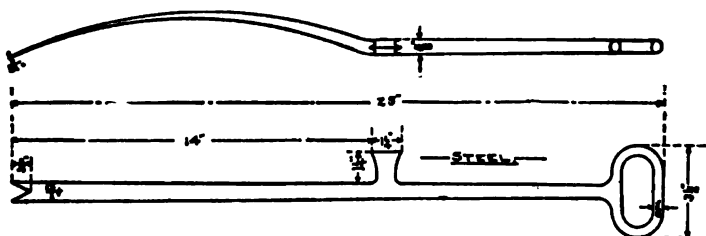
SEC. 10gg.—Packing tool for journal boxes. Curved type.
